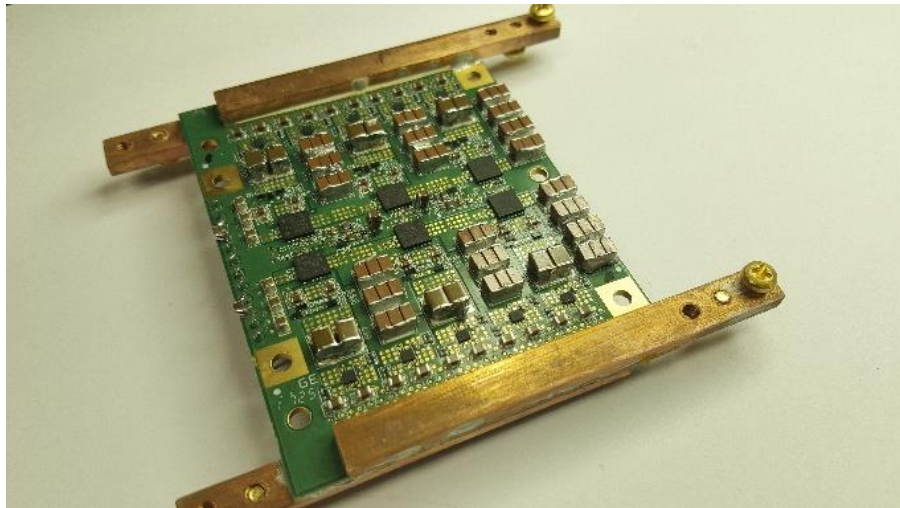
1.2kW 6x STC Prototype Bottom View
